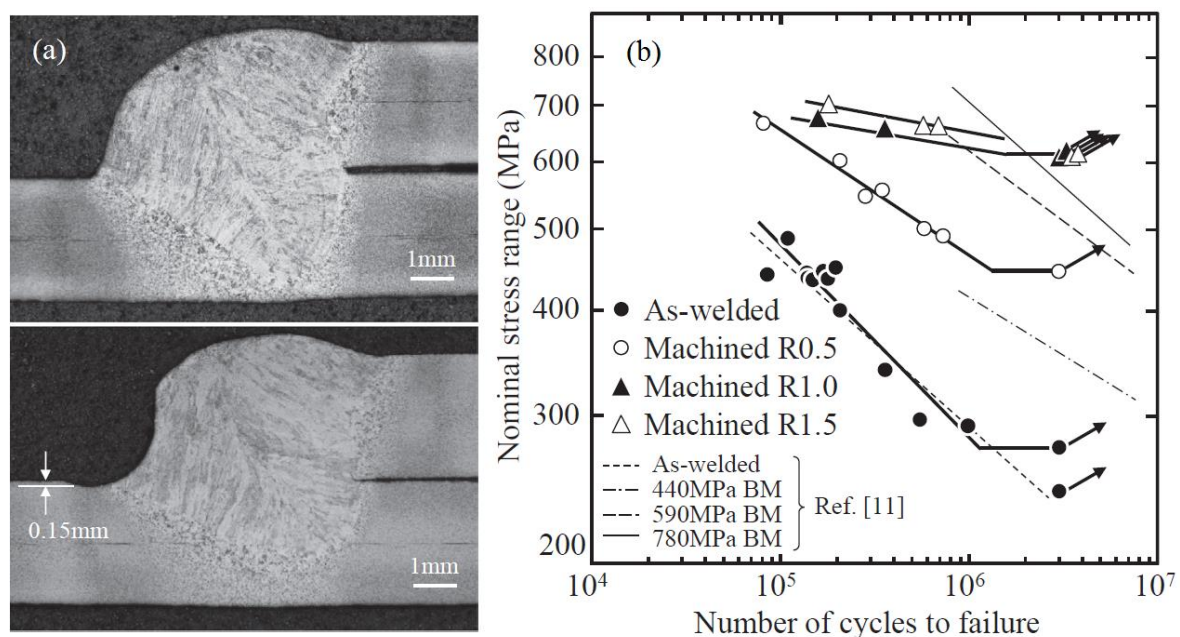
Aspect of the machined and non-machined weld toe (a) and fatigue strength (b) [104].
